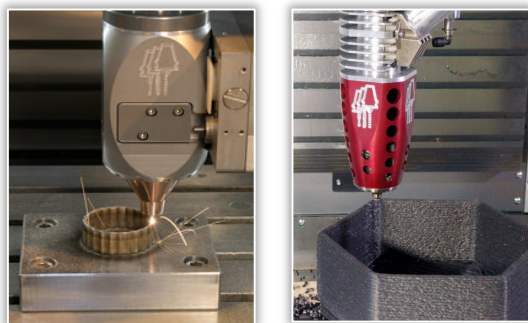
Laser DED extruder in a testing setup in a Haas VF series CNC machine [8]
